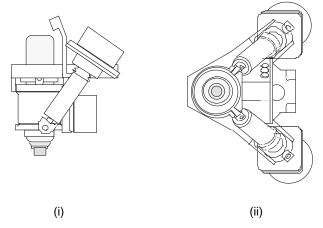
The Adaptive Deburring Tool. Side view (i), and bottom view (ii). The robot wrist would appear horizontal.
